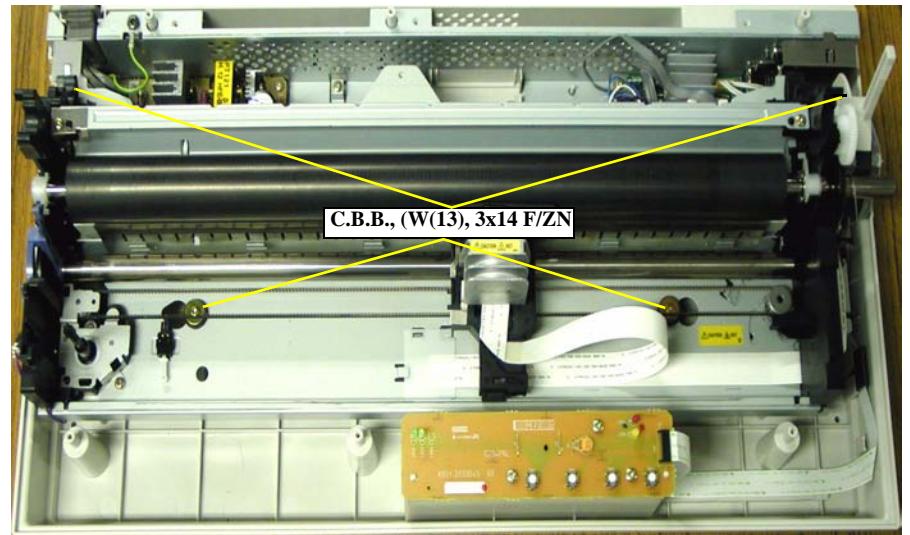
Printer Mechanism Removal (LX-1170II)
